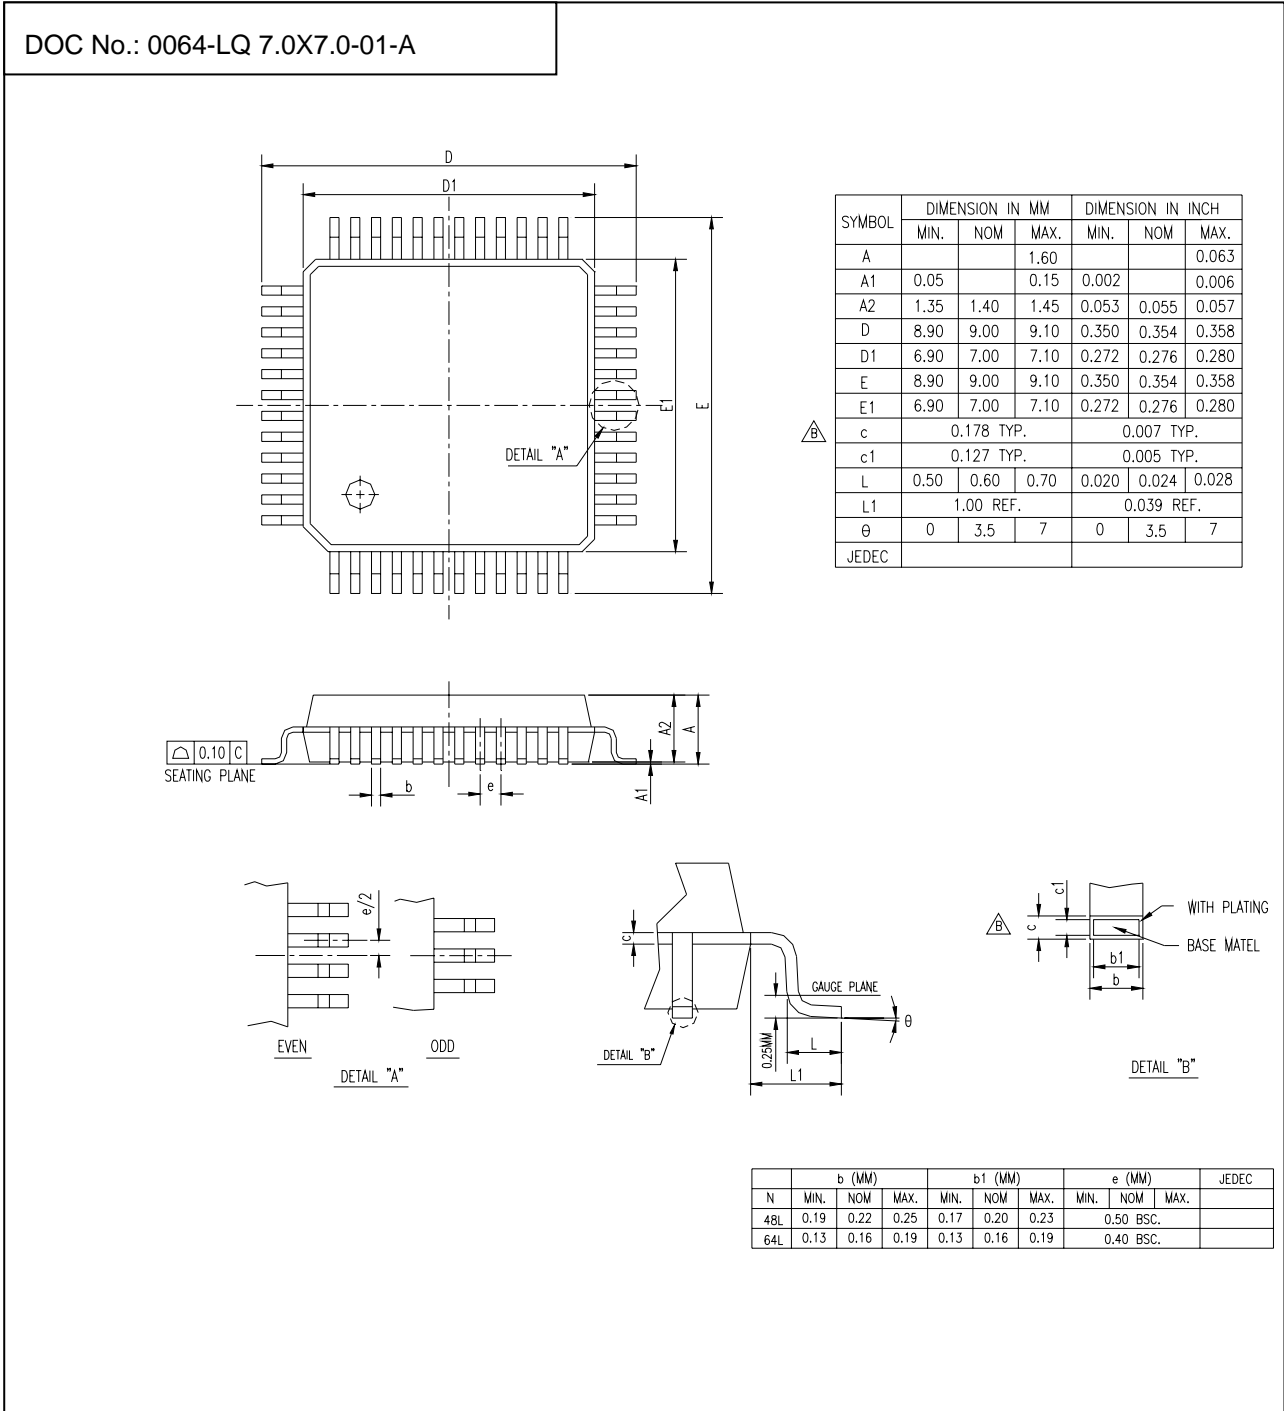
64 Pin LQFP 7.0x7.0x1.4 mm Package Outline Dimension
